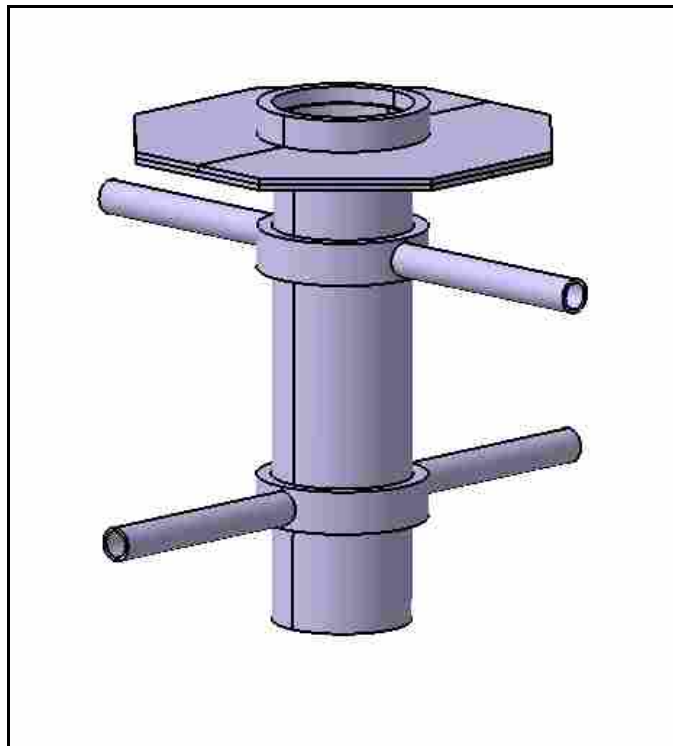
Assembled silicon carbide components including the main reactor tube, support plates, and access tubes.
